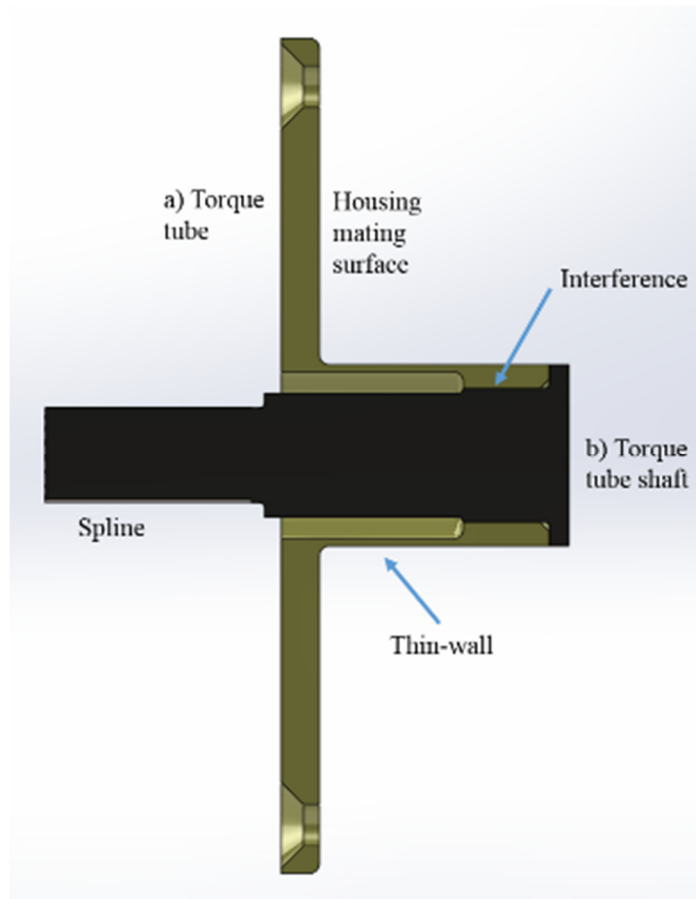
CAD rendering of cross-section of torque sensor sub-assembly of a) torque tube and b) torque tube shaft, showing key features.
